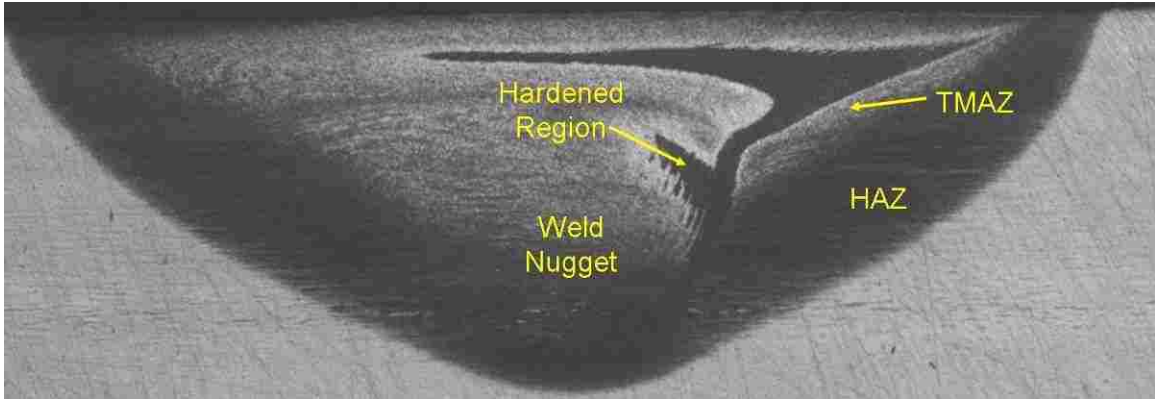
Photo of the different zones of weld material in HSLA-65: weld nugget, hardened region, TMAZ, and HAZ.
